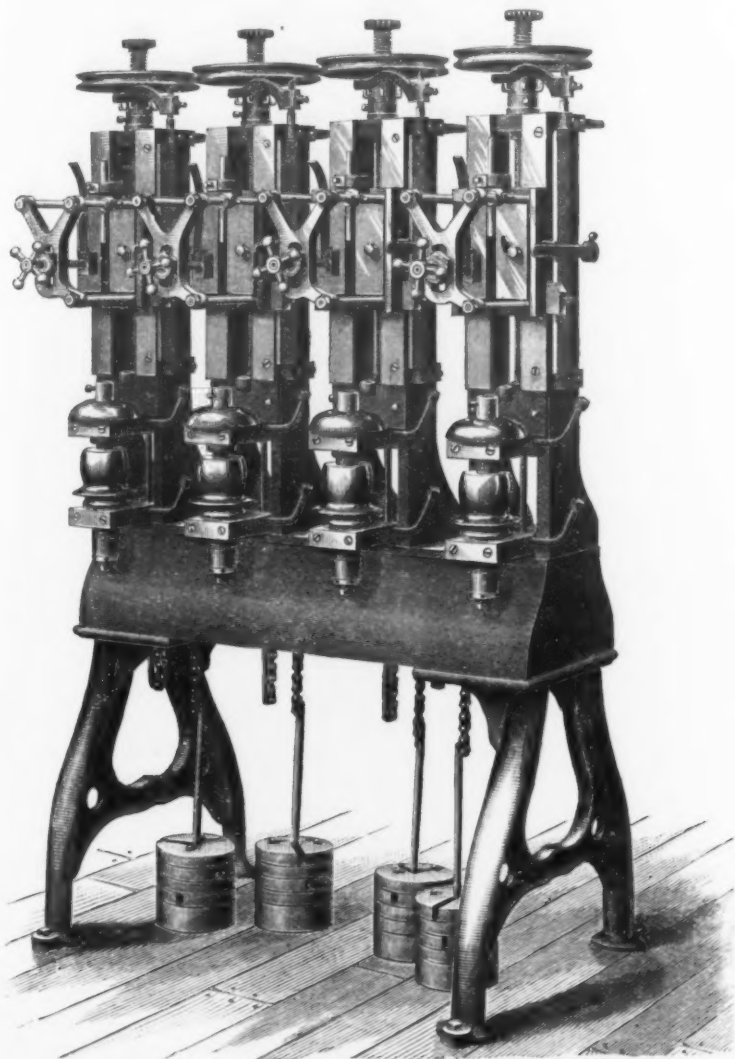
Semi-Automatic Butt and Hardware Drilling Machine.
